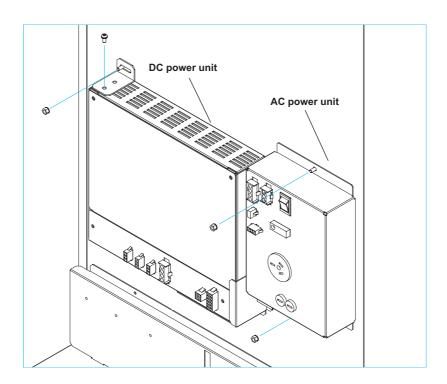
Removing the AC and DC Power Units in the ES500 Machine
